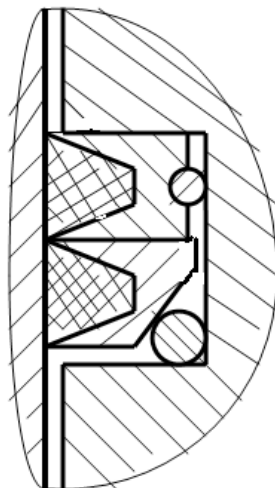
Cross section of the package of half-rings with by pressing the rings to the upper end the surface of the annular groove by means of an annular spring and an oblique cut of the edge of the lower ring
